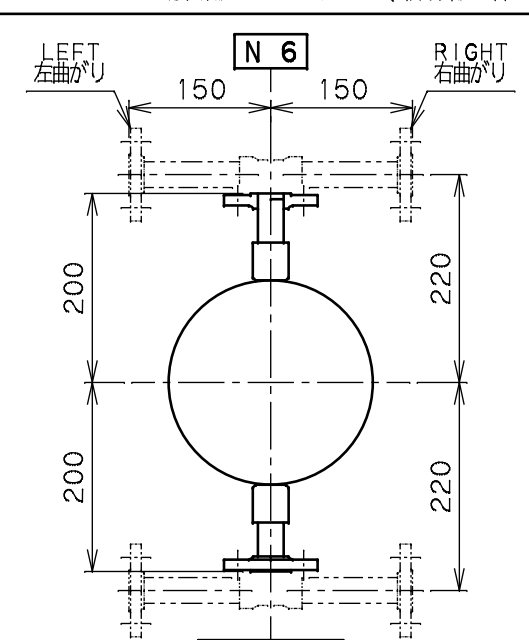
DETAIL OF "SHELL SIDE" NOZZLE (VIEW A-A)
